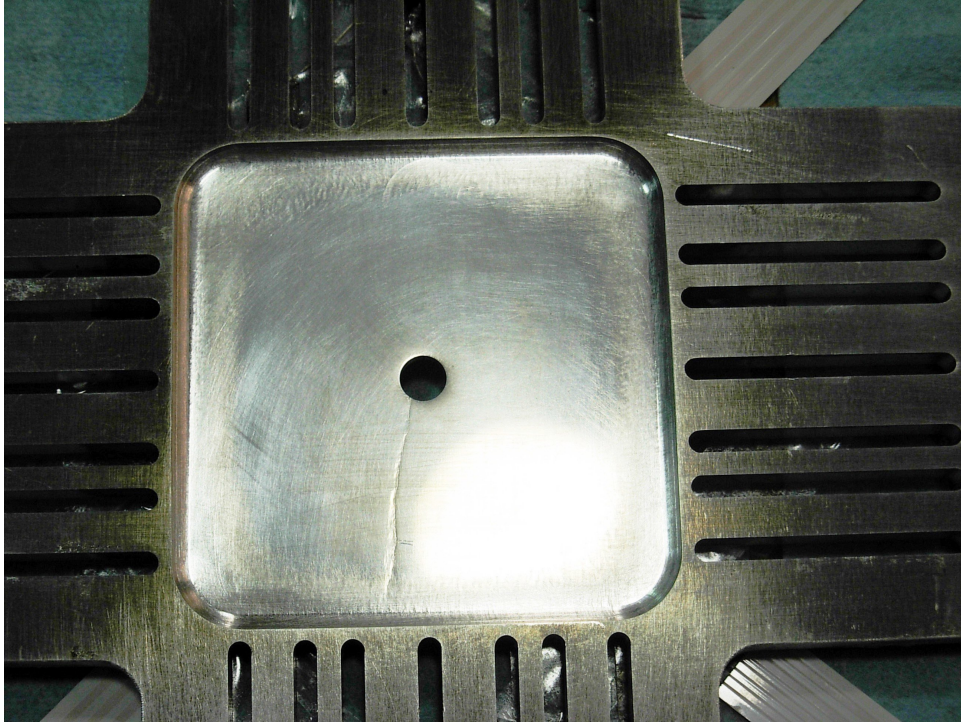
Closeup of tested specimen fatigue crack.
